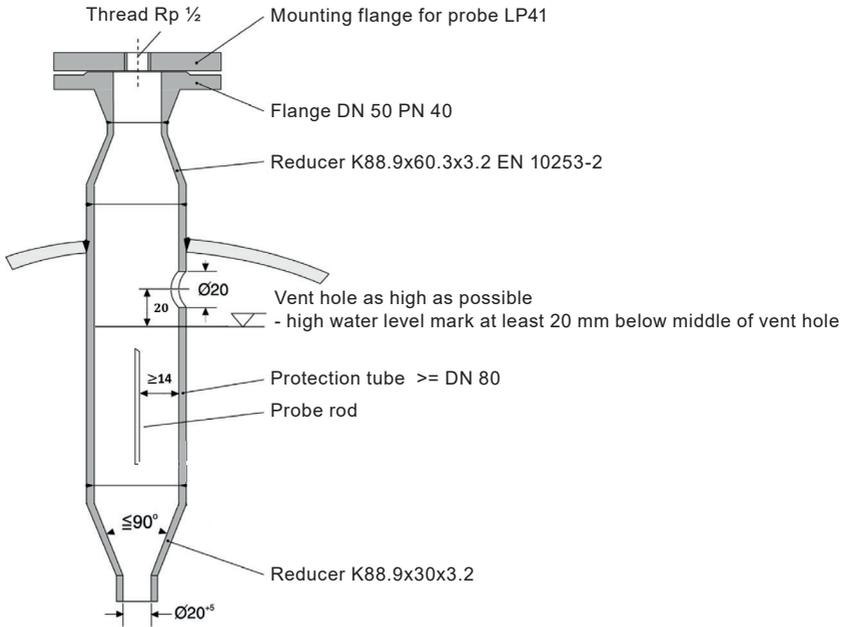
Installation example 1: Inside the boiler with protection tube provided by the customer
